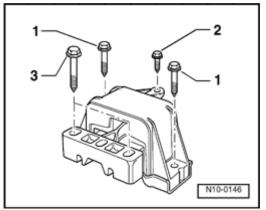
Identifying Engine Mounting Bracket & Bolts Courtesy of VOLKSWAGEN UNITED STATES, INC.
